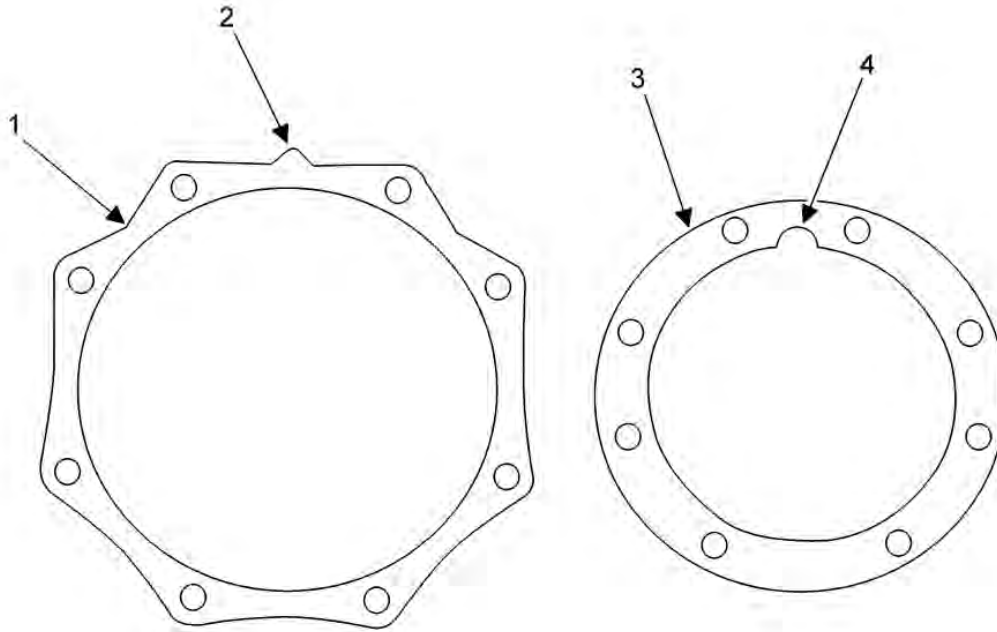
Crankcase Rear Bearing Case Cover - Component Alignment.
